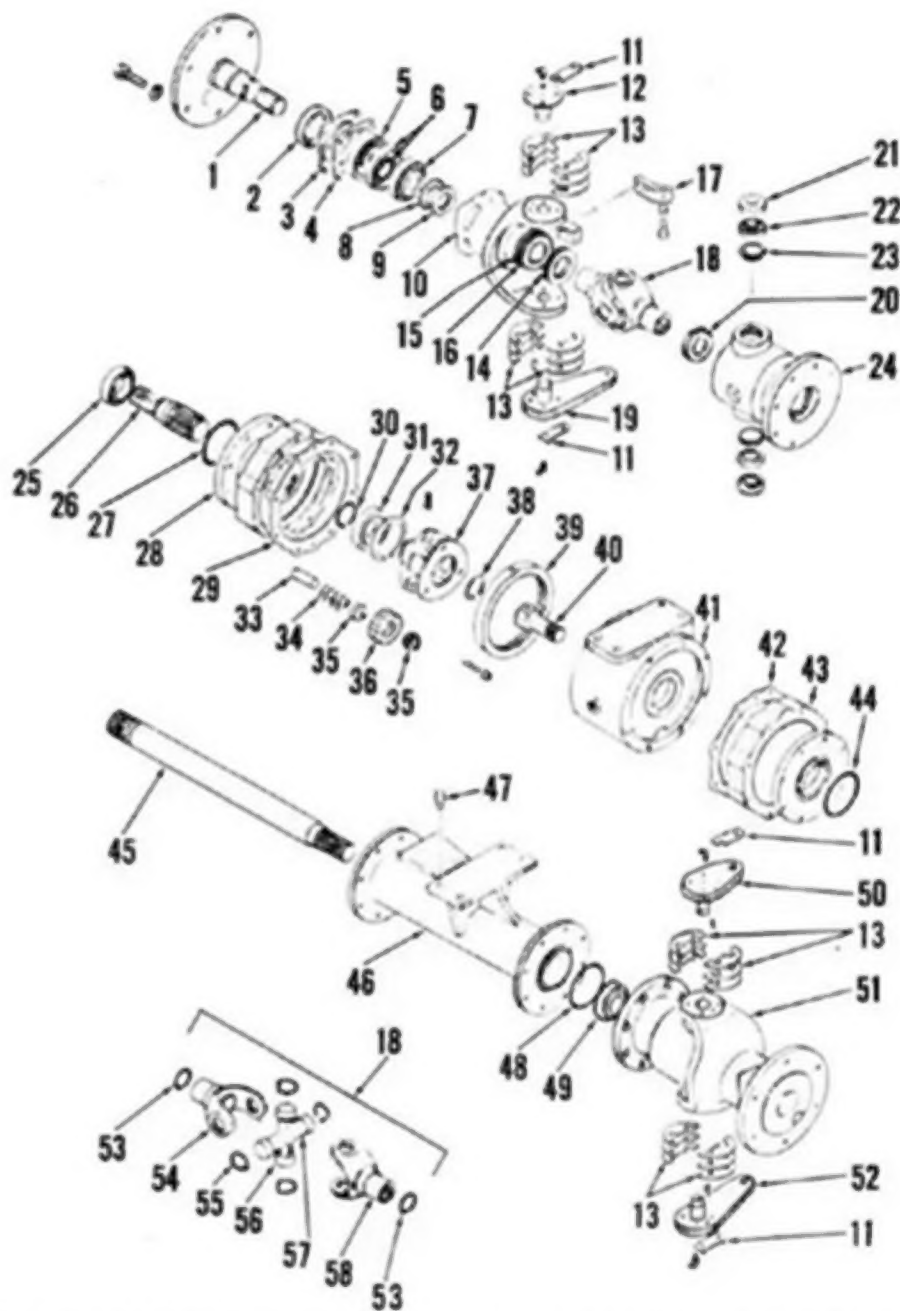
Exploded view of front drive axle assembly. Refer to Fig. 5 for center (front differential) section.
